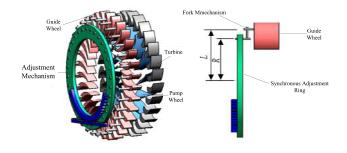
Guide vane adjusting mechanism of hydraulic torque converter.
